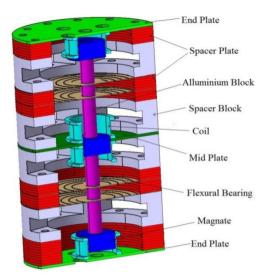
Sectional view of CAD model of electromagnetic conversion device.
